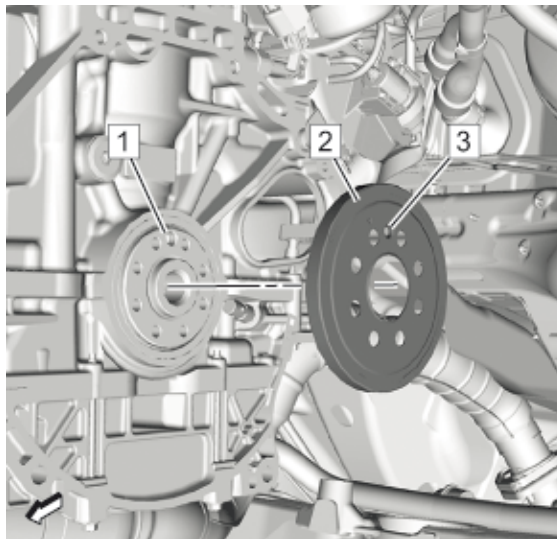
Crankshaft Position Sensor Reluctor Ring
